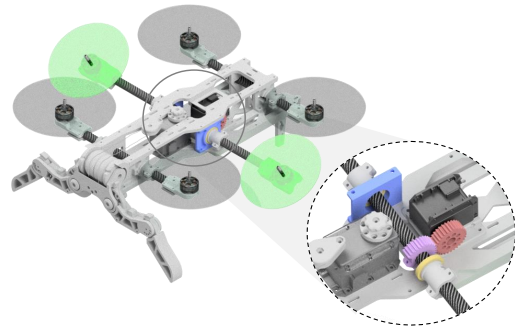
The tilt-rotor mechanism, consisting of two rotors (green), which rotate simultaneously about the arm’s central axis. A gear (red) is fixed to a servo motor head, which drives a gear (purple) on the rotor arm. The arm rotates via bearings (yellow), which fit within a custom housing (blue).
